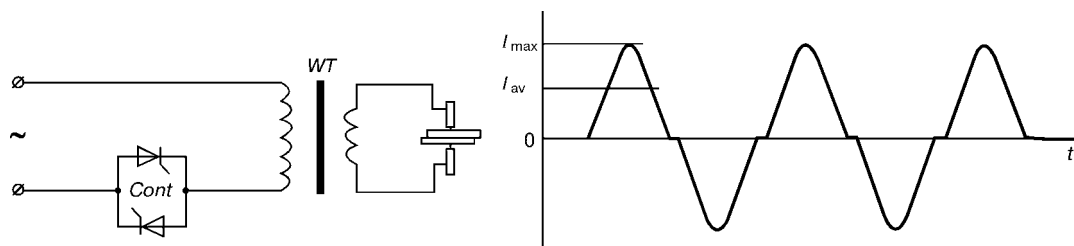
Power circuit of AC machine: WT – welding transformer; Cont – thyristor contactor; t – time
